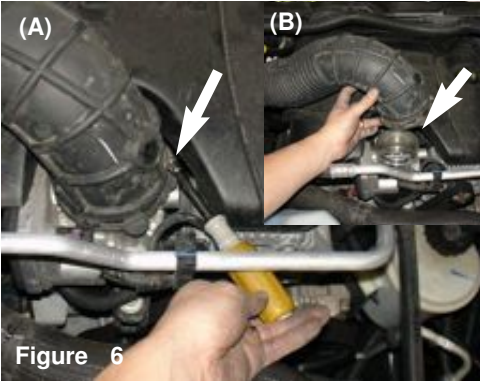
(A) Use a 8mm nut driver and loosen clamp on air duct connected to throttlebody.
